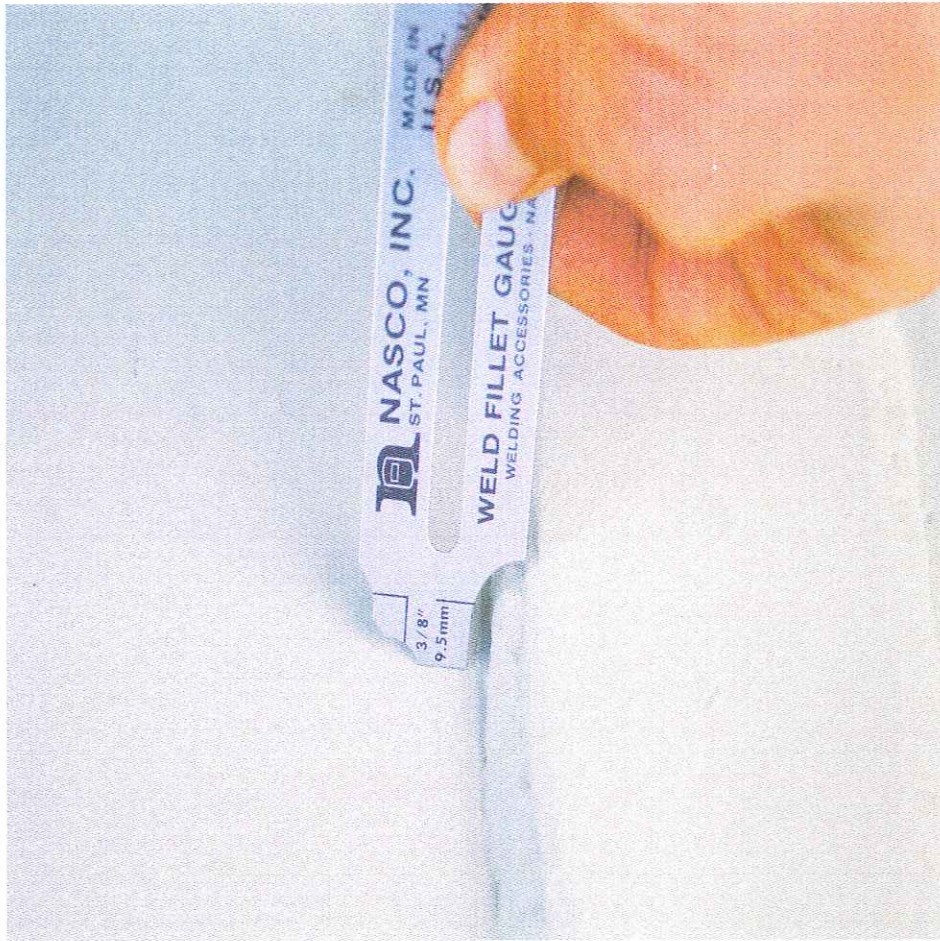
Fillet welded joints of many anchorage straps do not satisfy design requirements due to the excessive gap between adjoining surfaces, undersizing, and poor profiles.
